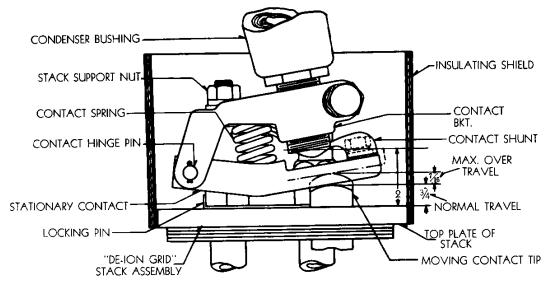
Stationary Contact Assembly, with C-Size De-ion Grids—Sectional View
